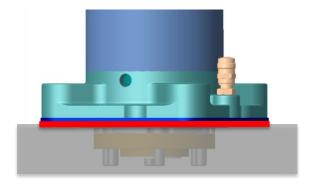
Bubble Leak Test at base of valve (red) to check primary PRV mounting gasket.
